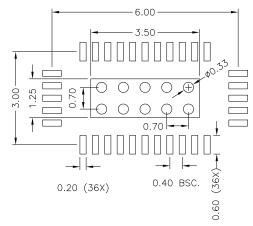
42-contact TQFN (ZH42) Package Mechanical Drawing
